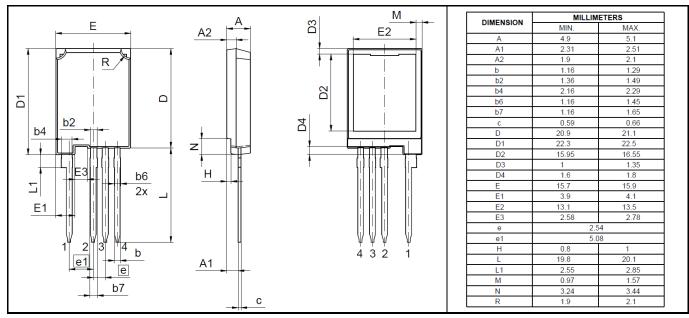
TO-247PLUS 4pin mechanical drawing and dimensions
